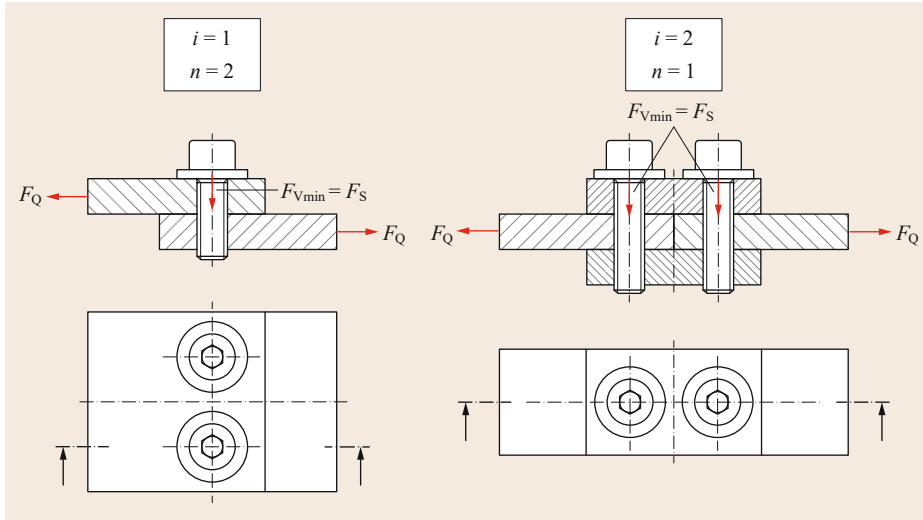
Diagram showing the relevant number of bolts n and the friction pairings i_R in transversely loaded bolted joints
